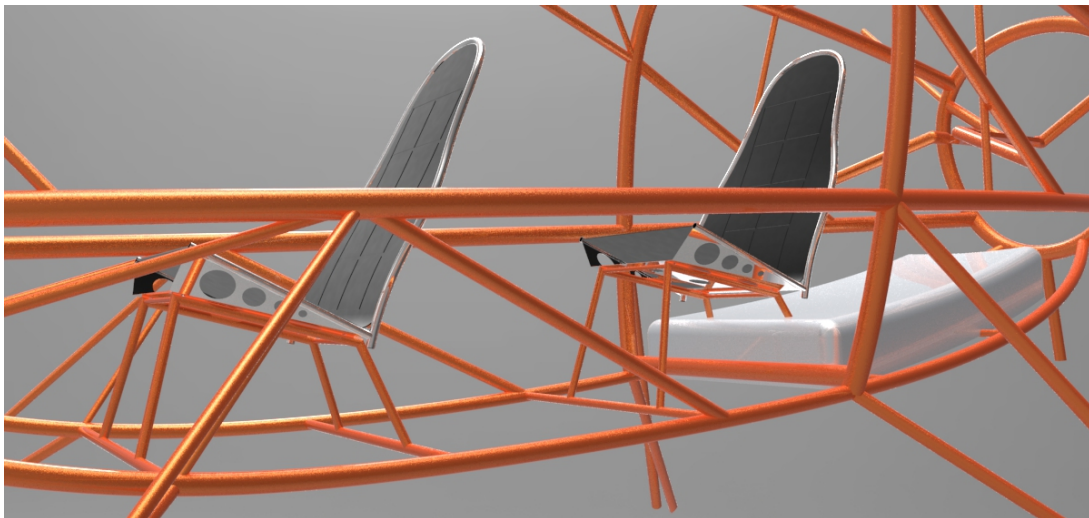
Design of chair truss structure and the fuel tank positioning.
